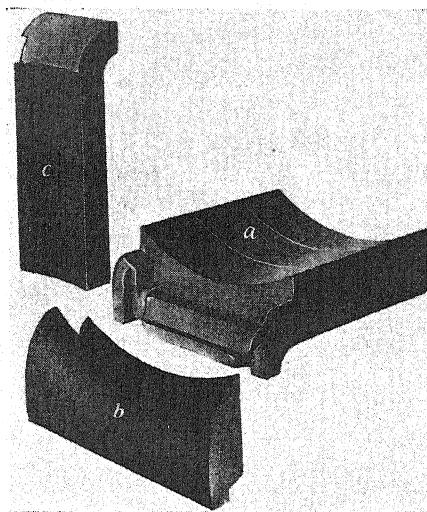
Block Bearing *a* with Collar *b* and Top Segment *c
